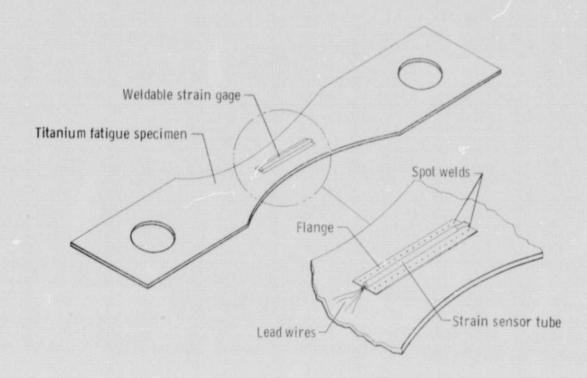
Strain gage spot welded to Ti-6Al-4V fatigue specimen.
